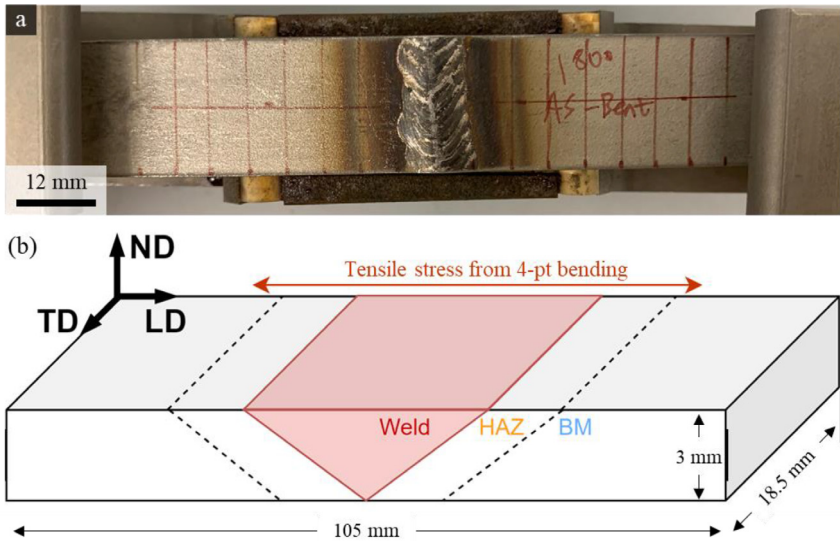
(a) Top view of the as-welded coupon loaded in 4-point bending fixture before SCC testing; (b) schematic diagram of the different zones in the testing coupon.
